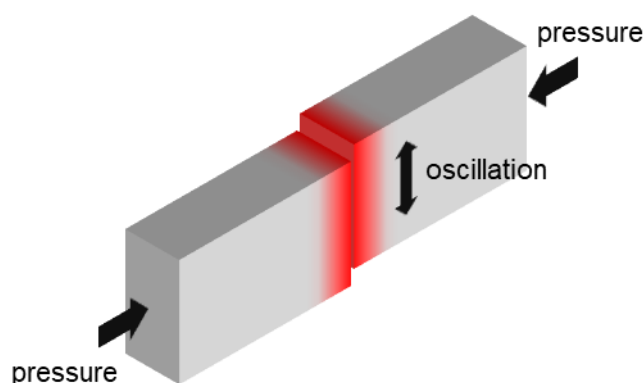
Schematic illustration of linear friction welding.
